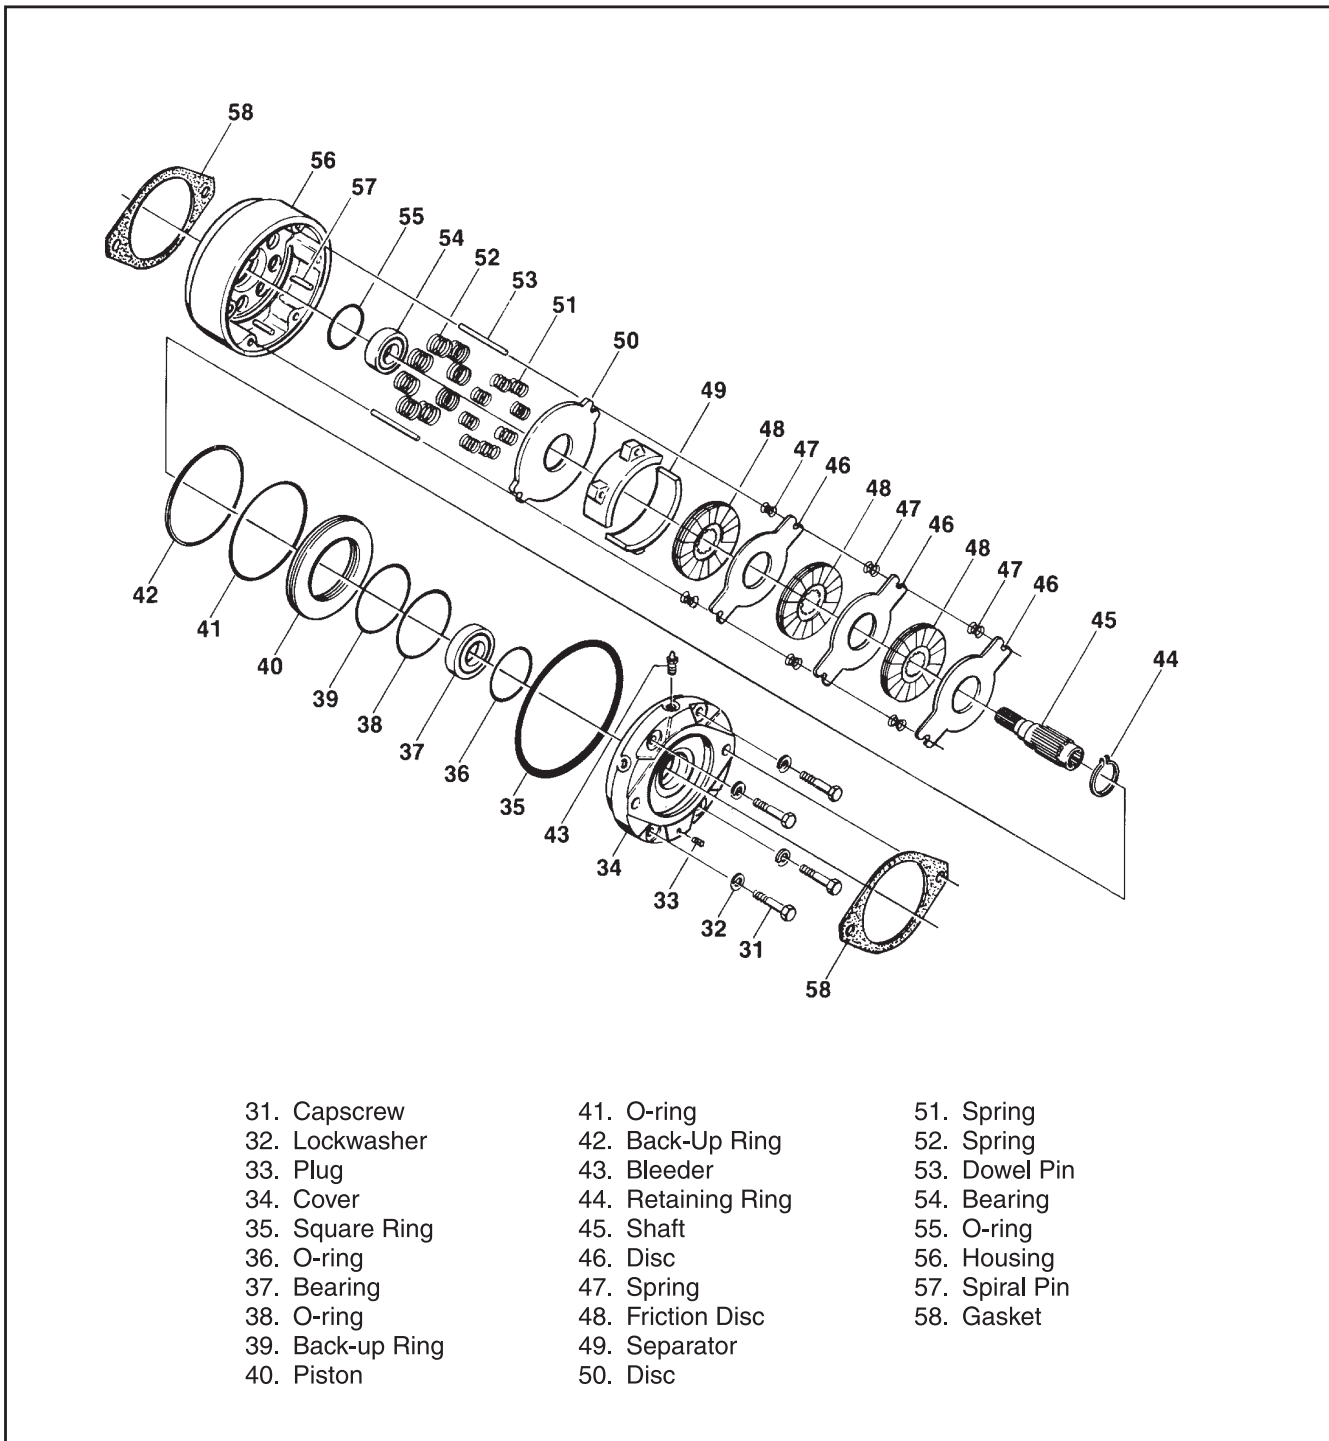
Swing Brake - Mico - Machines Built to 1992
